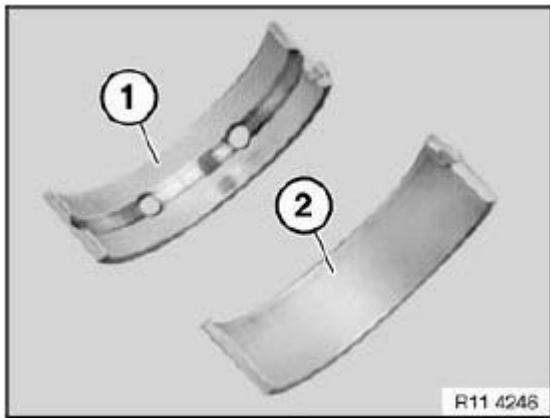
Identifying Bearing Shell With/Without Lubricant Groove
